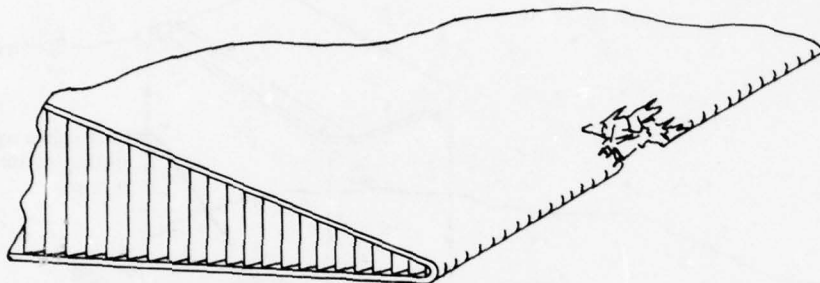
Typical Damage to Wrap-Around-Type Trailing Edge Close-Out
